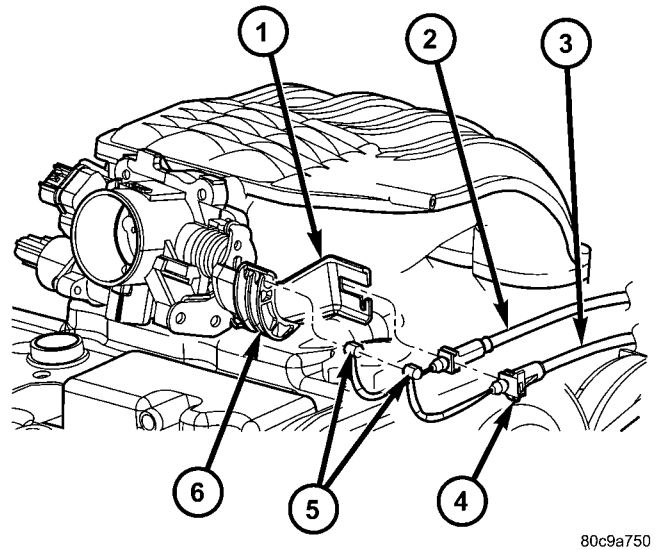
THROTTLE CABLE, PIN, RELEASE TAB - 2.4L
